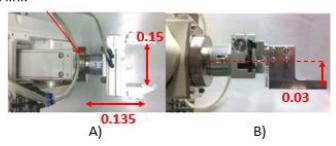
ATTACHMENT OF THE TOOL AND LOCATION OF THE TOOL CENTRAL POINT (TCP), UNITS IN METERS. TOOL SHOWN IN OPEN POSITION
